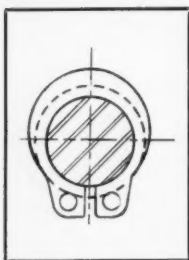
This sketch shows an external type of retaining ring which can be used with screw-type latches.
